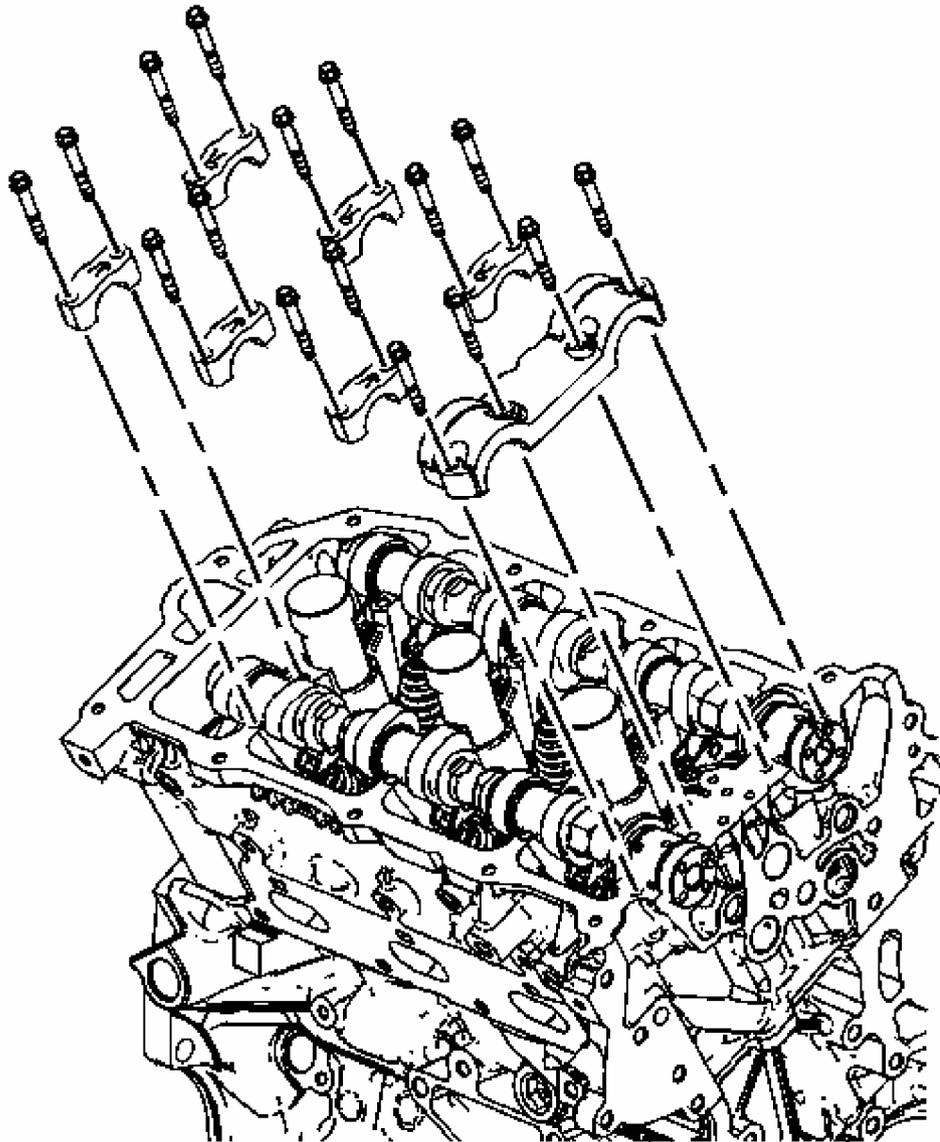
View Of Camshaft Bearing Caps & Bolts
